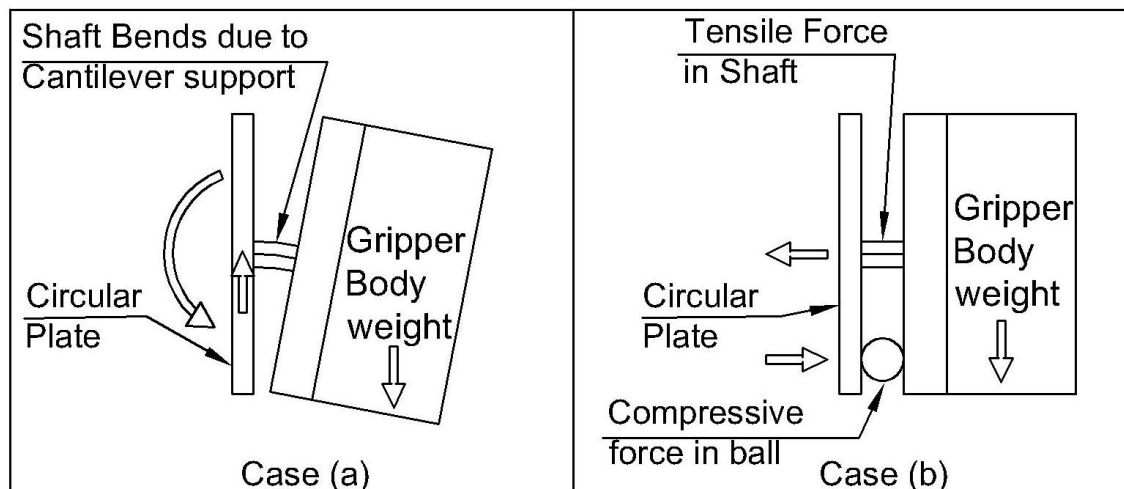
Eliminating bending stress from the shaft using a Circular Plate with spherical balls
